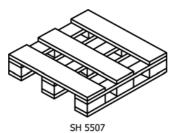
Four-Way Entry Design (Typical Pallet Construction)
